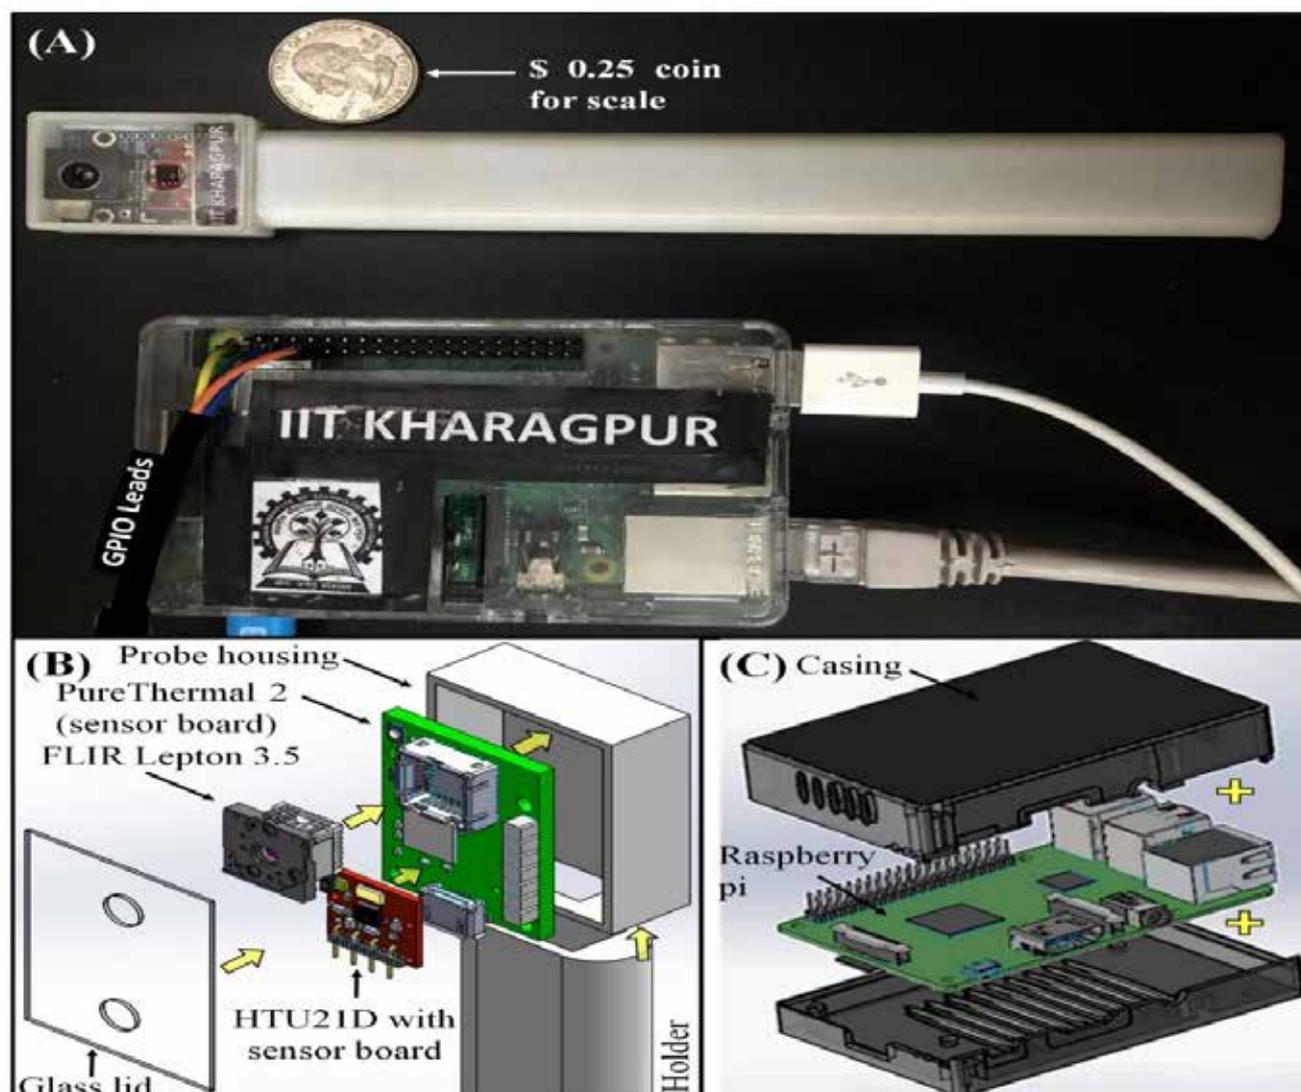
A) Photograph of the portable blood perfusion imaging device, B) Exploded internal view of the device, C) Exploded view of the electronic processor.
